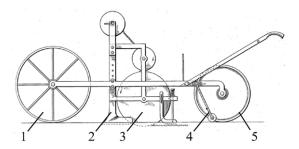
Seeder tape planter designed by Sanford [89]. 1, front-wheel 2, furrow opener 3, rope guiding wheel 4, scribing wheel 5, pressing wheel.
